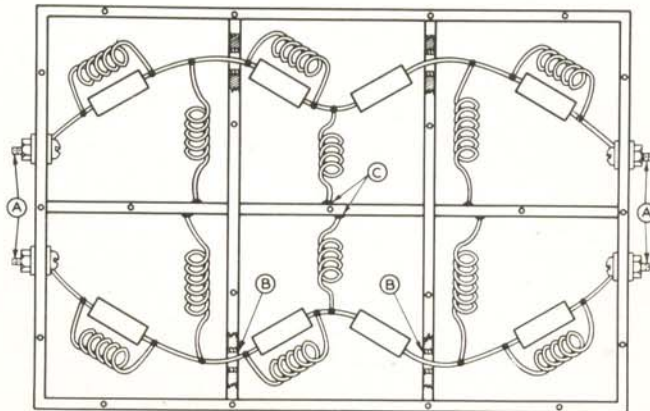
Top view showing the arrangement of the parts in a three-section, series-derived, low-pass filter. The top and bottom plates of the shield box are not shown. When these plates are bolted into position, the shield box completely encloses the components. The shield box should be bolted to the transmitter cabinet where the transmission line emerges.
